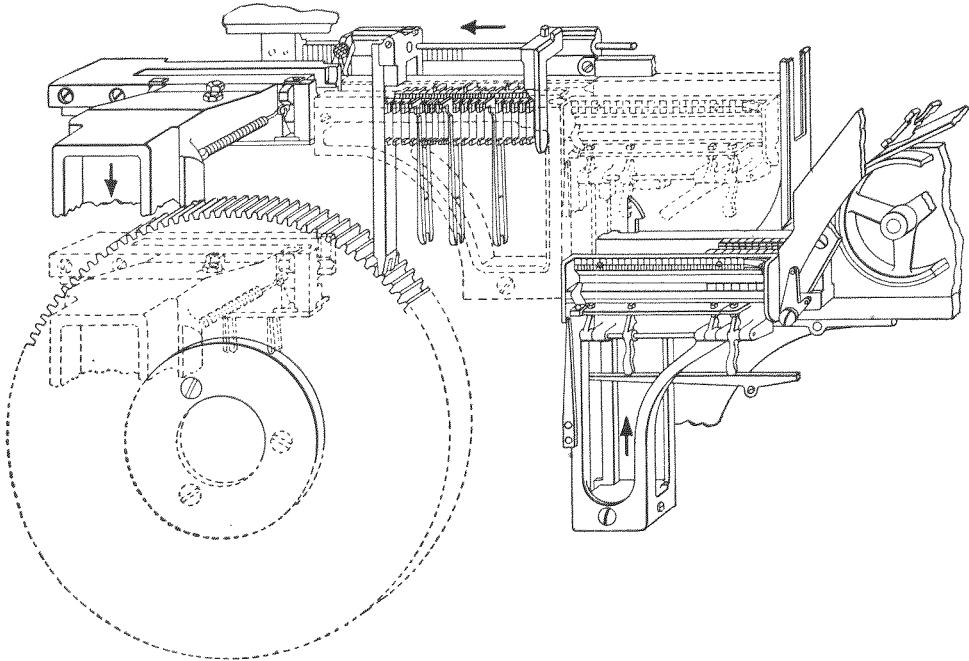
Diagrammatic view of the transfer of the line of matrices and spacebands from the assembling elevator to the first-elevator jaw to the position to cast.
